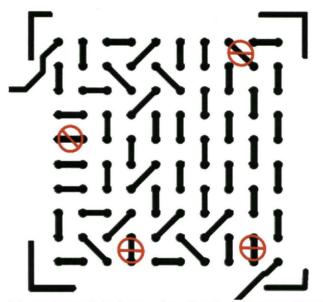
Test Vehicle Drawing, Chip Scale Package (CSP)
